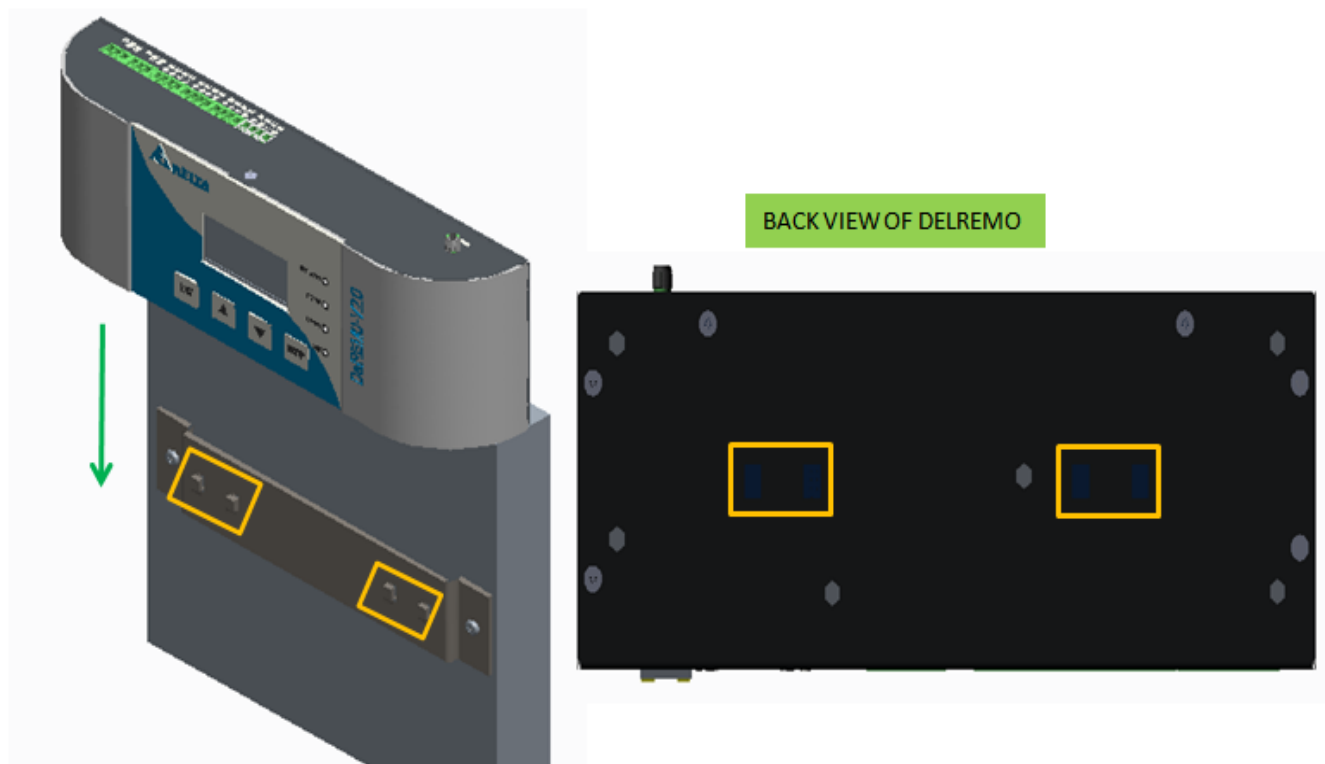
DelREMO-V2.0 Wall Mounting Arrangement
